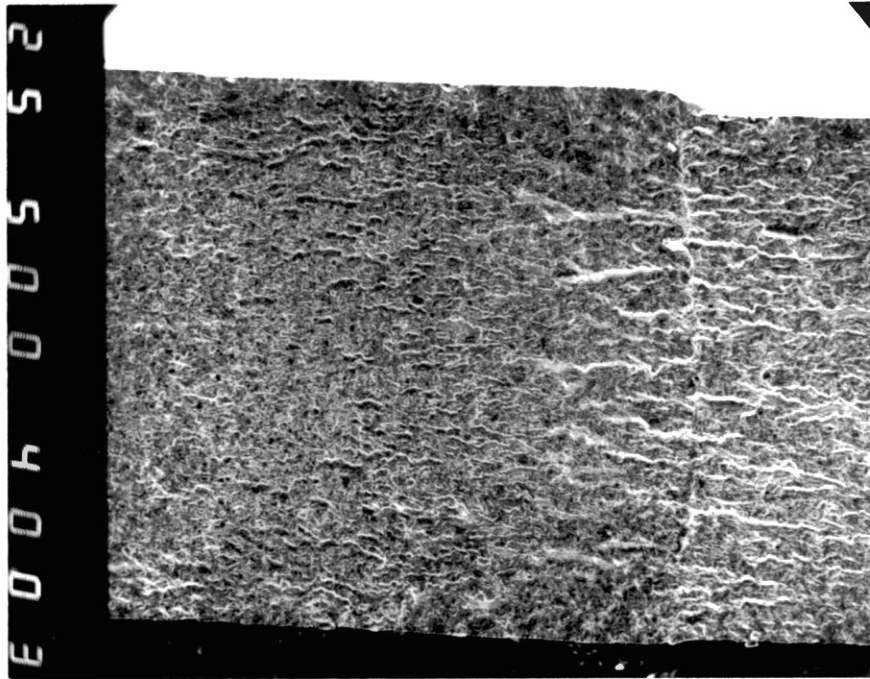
Fine Grain Axial Fatigue Fracture Surface.
